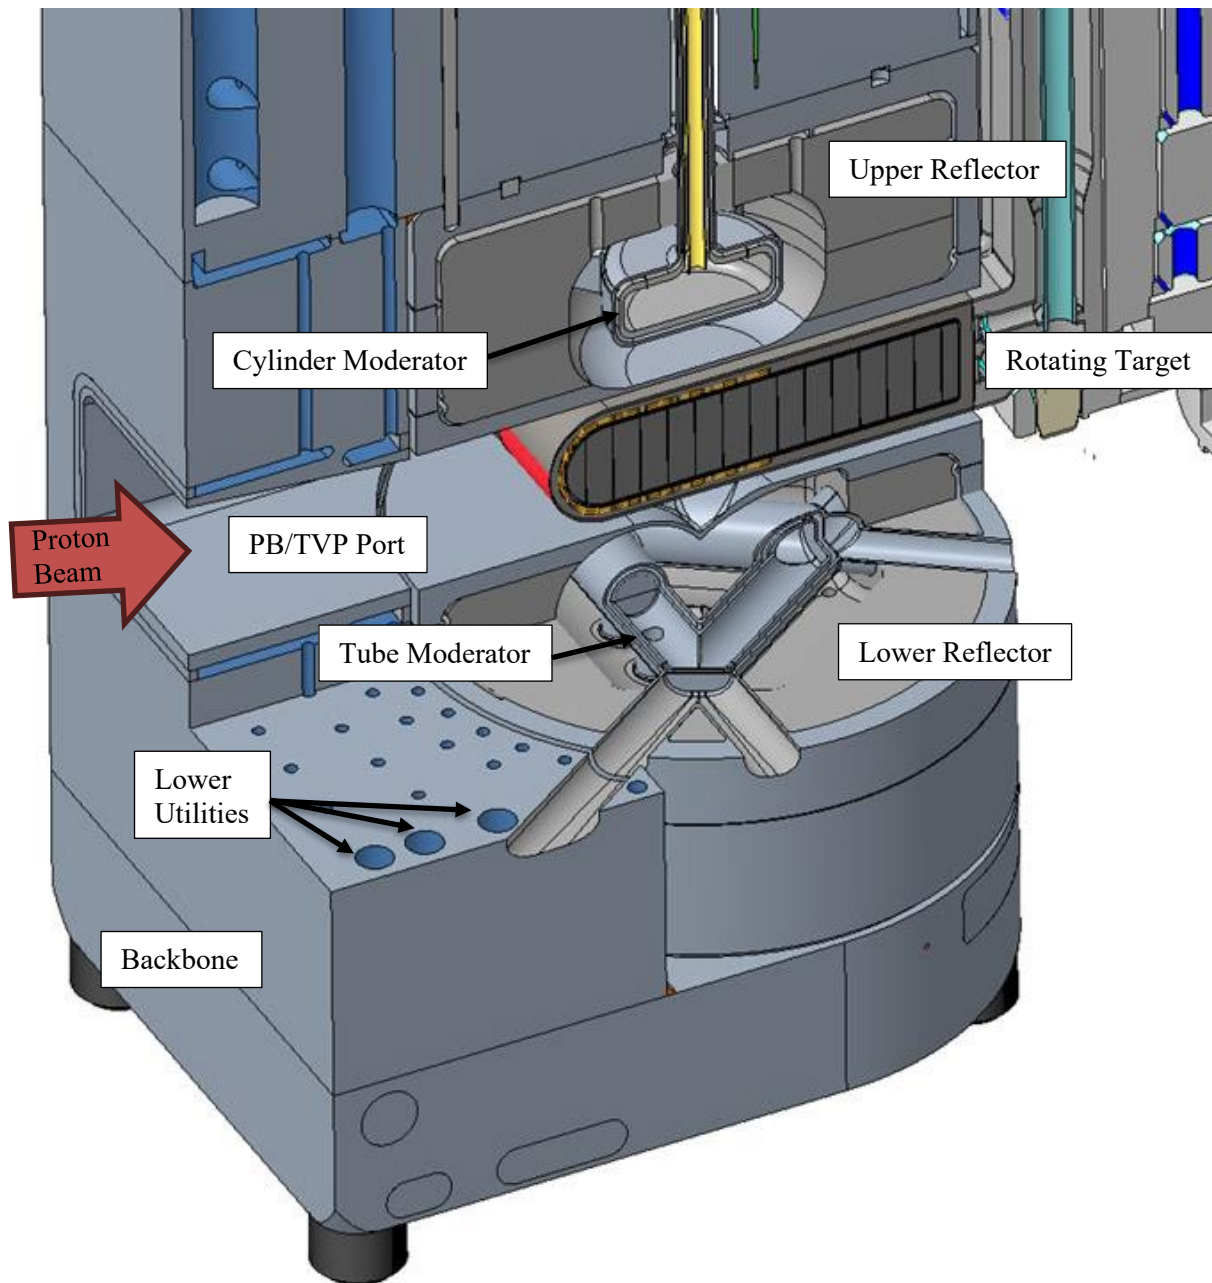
Moderator Reflector Assembly and Target Assembly Layout.
